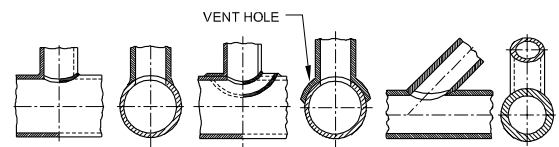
Typical Welded Branch Connections
